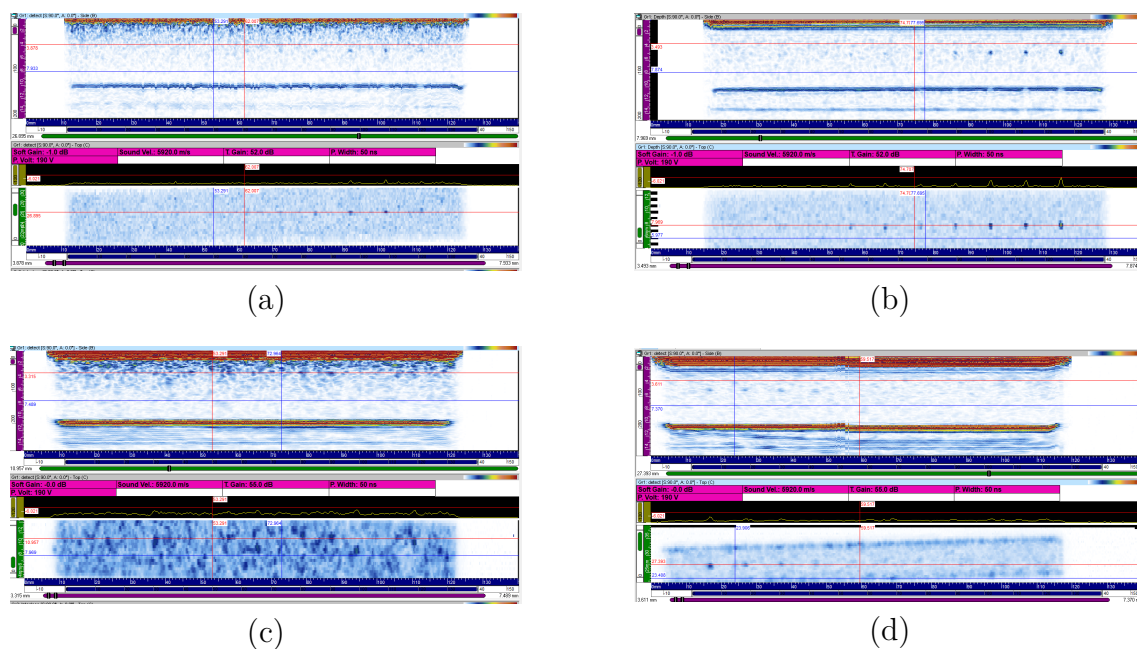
Conventional UT scan results of Alloy 247 internal defects with machined and unmachined surfaces using 2.5" and 3.25" probes in Blocks III and IV . (a) Unmachined, 2.5" probe, (b) Machined, 2.5" probe, (c) Unmachined, 3.25" probe, (d) Machined, 3.25" probe. The top section shows B-Scan results, and the bottom section shows C-Scan results with an echo dynamic curve.
